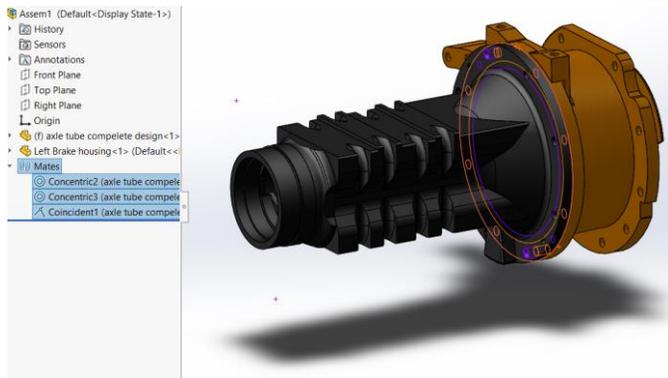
ASSEMBLY OF AXLE TUBE AND BRAKE HOUSING
